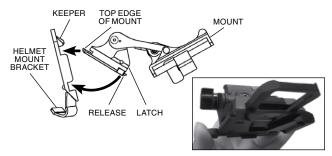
REASSEMBLY OF HELMET MOUNT
